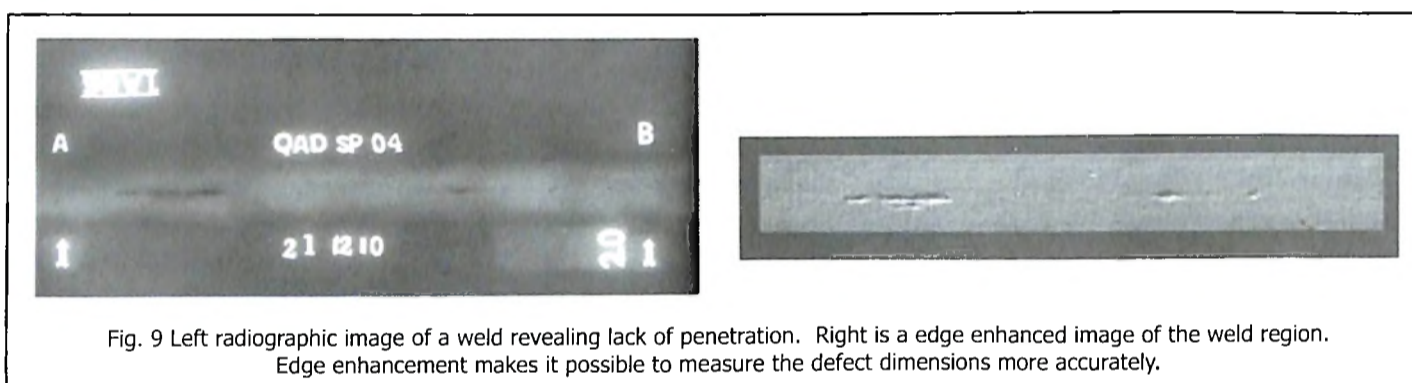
Left radiographic image of a weld revealing lack of penetration. Right is a edge enhanced image of the weld region. Edge enhancement makes it possible to measure the defect dimensions more accurately.
